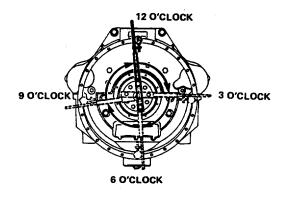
Flywheel Housing End Clearance Measurement.
